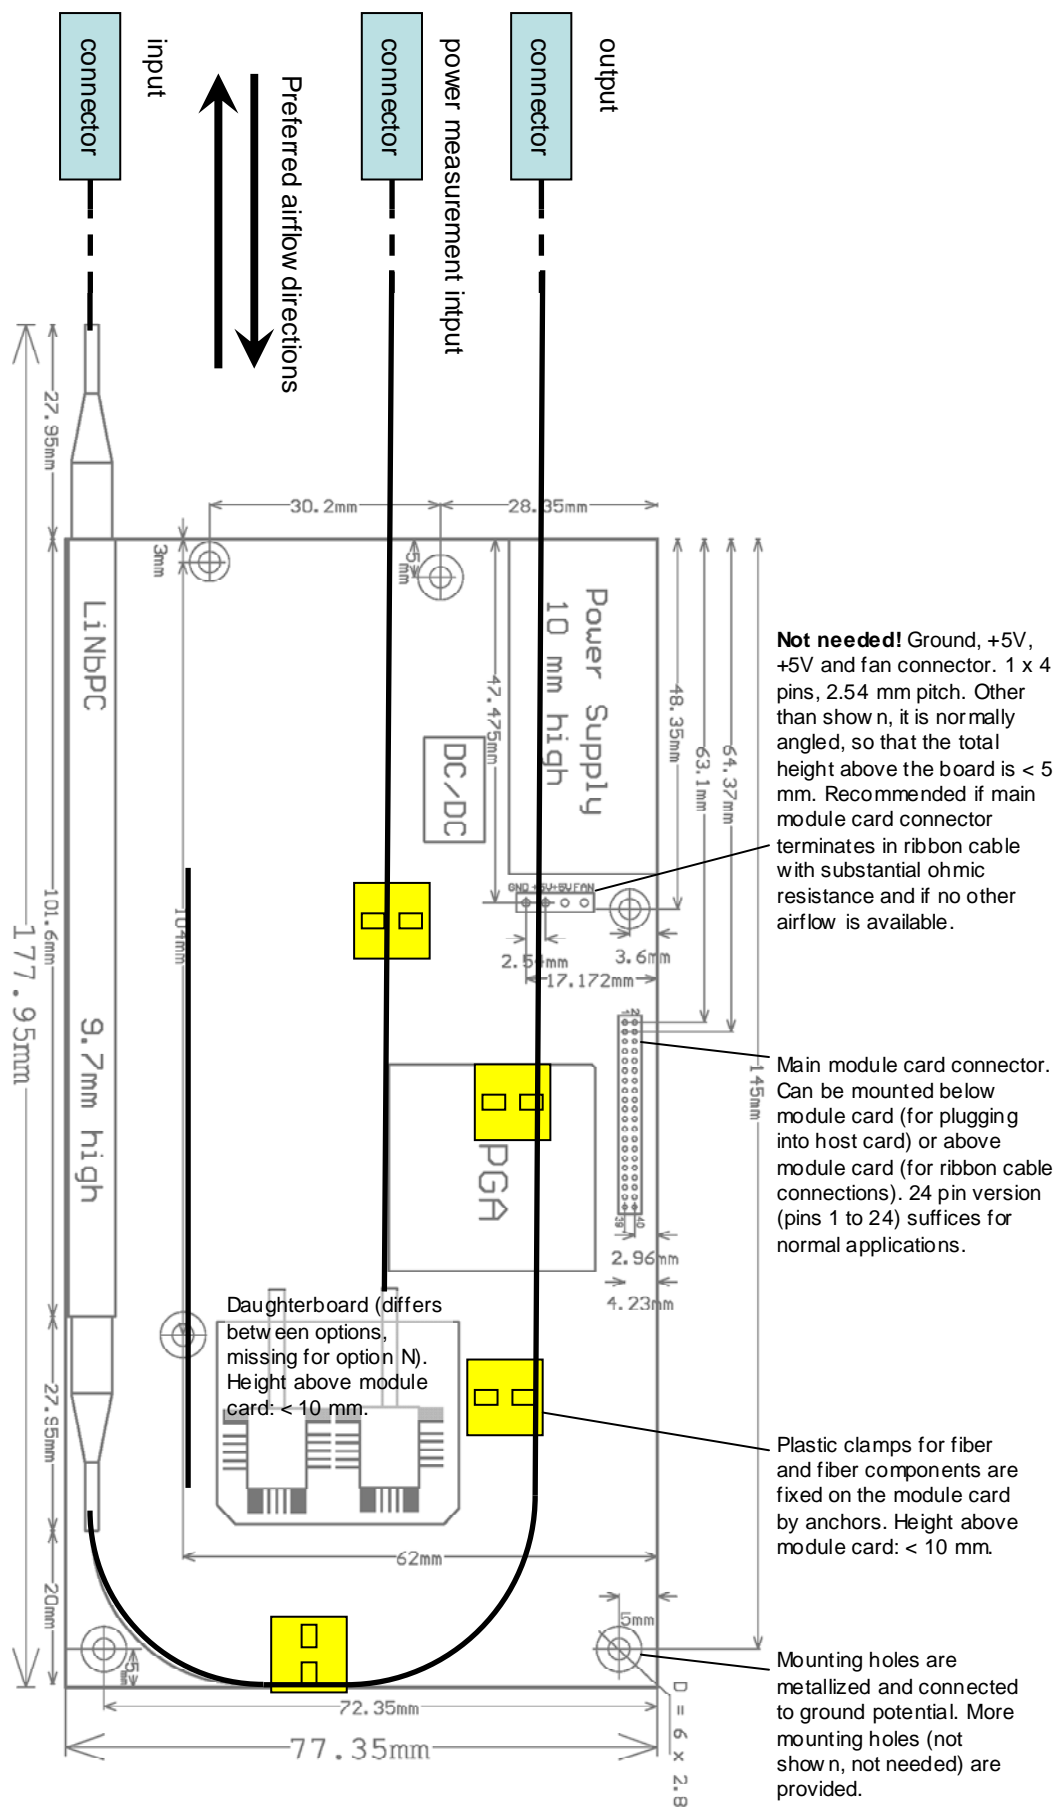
Approximate fiber layout (shown with option O for optical power measurement)
